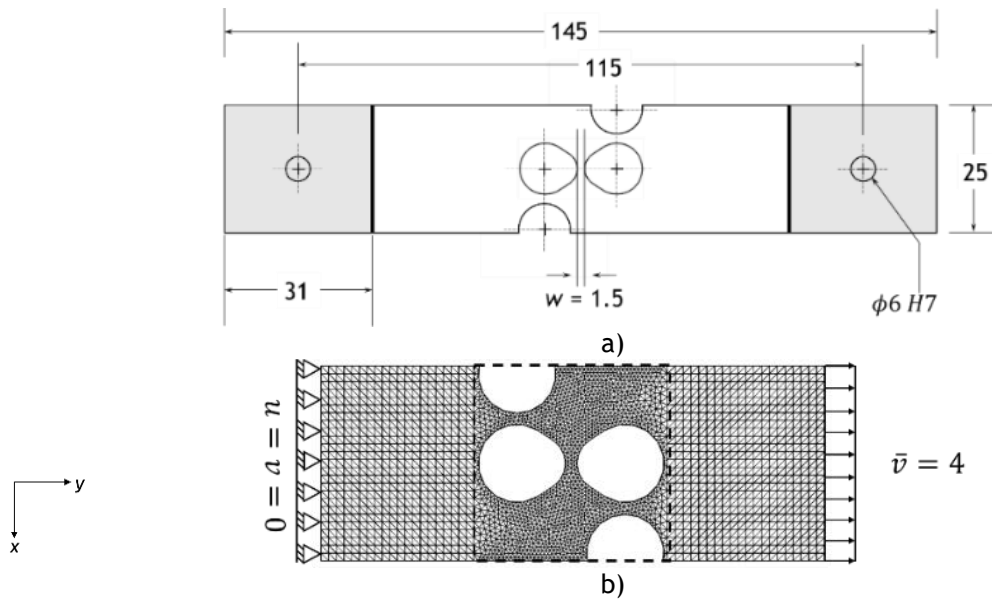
Modified bi-failure specimen, AA6061-T6 W1.5: a) a general view with geometrical dimension presentation and b) FEM model, dimensions are in mm.
